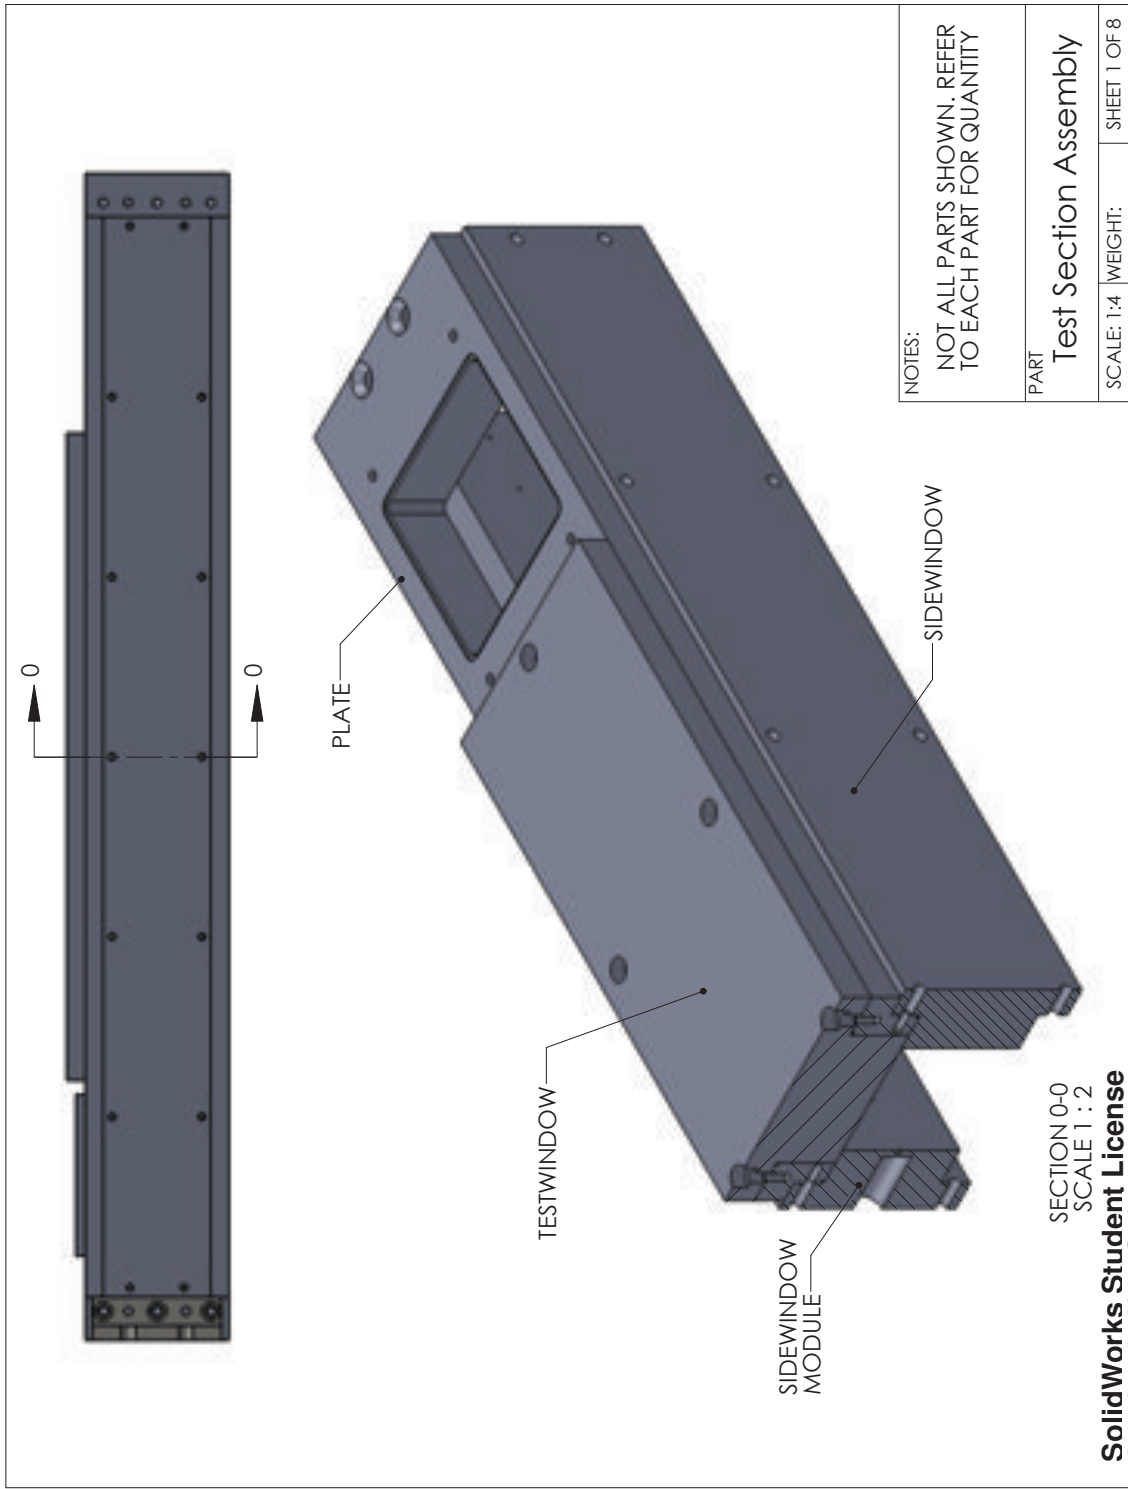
Assembled test section cut away view of acoustic liner installation port and side windows.
